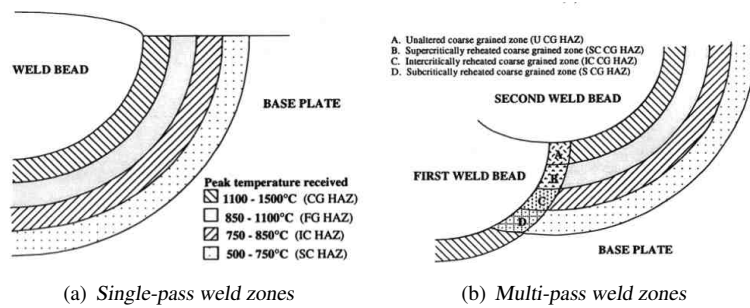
Schematic figure of the HAZ zones developed during:(a) single-pass welding and b) multipass welding [41].
